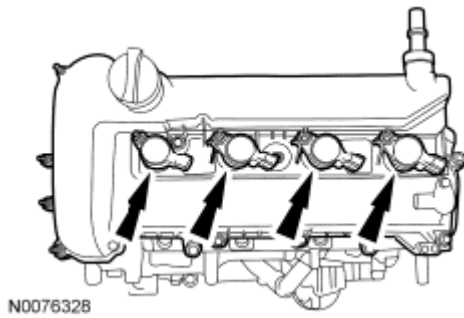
Locating Ignition Coil-On-Plug Bolts
